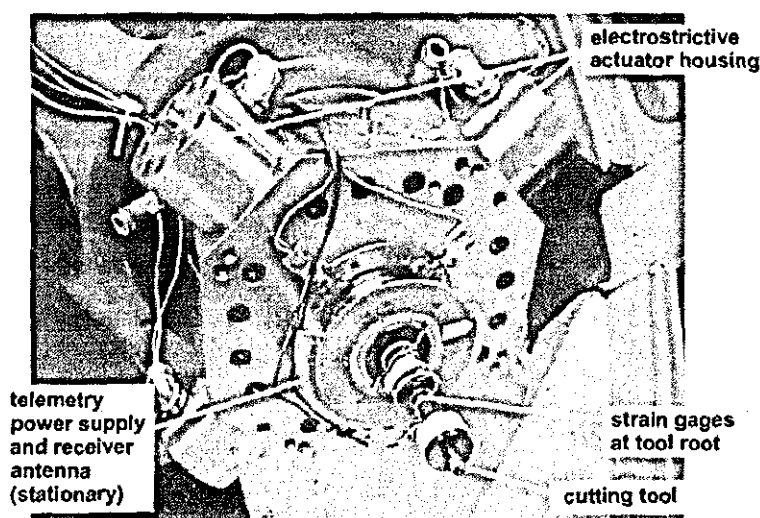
Spindle unit with four collocated electrostrictive actuators for a milling machine (Dohner et al. 2004)
